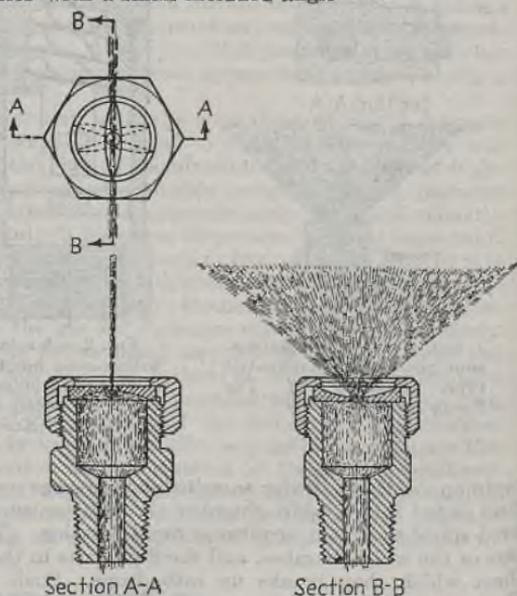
One type of fan nozzle. (Courtesy of The Spray Engineering Co.)
